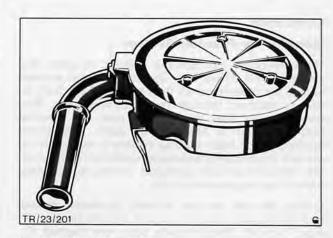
Air cleaner Assembly (OHC Type Illustrated)
